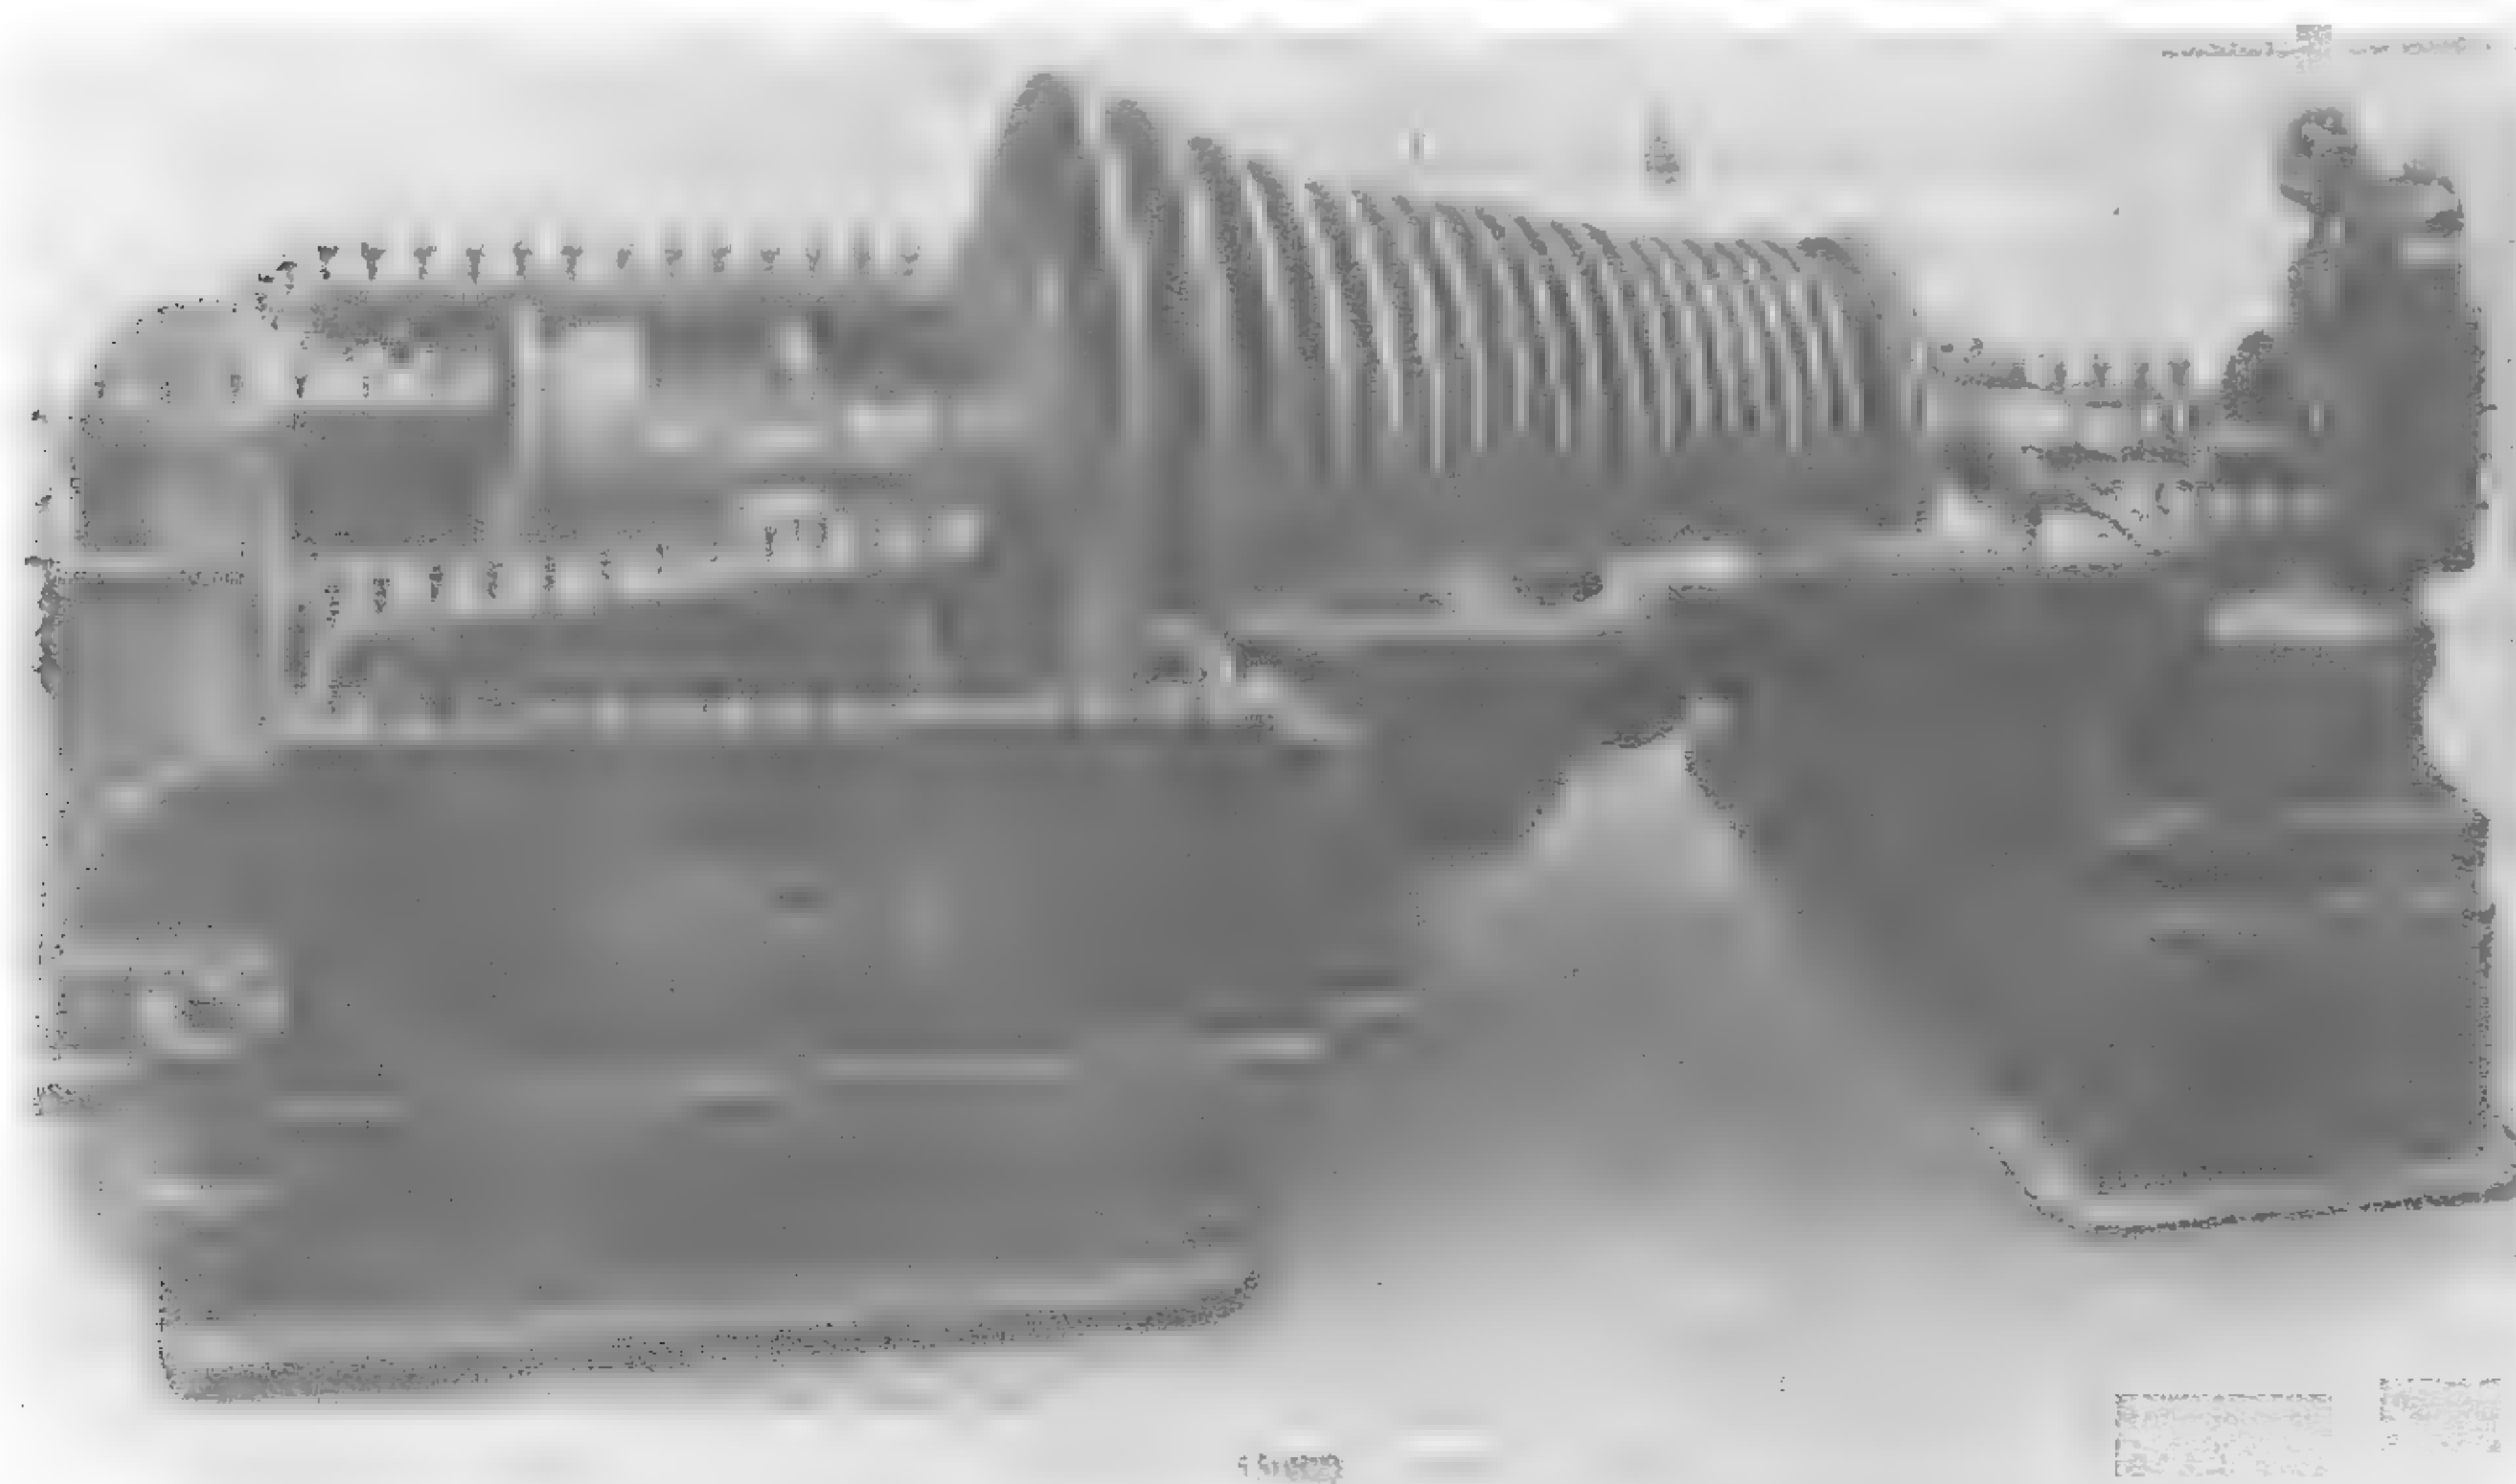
Single-cylinder turbine with upper half of casing removed
